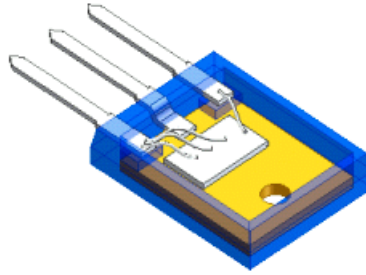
Opened-up view of a TO-247 MOSFET package.
